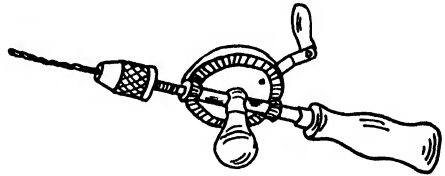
The hand drill is a very useful tool for drilling small holes in either wood or metal.
